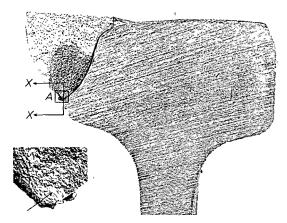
, Sections of Cracked Wheel Flange and Worn High Rail
